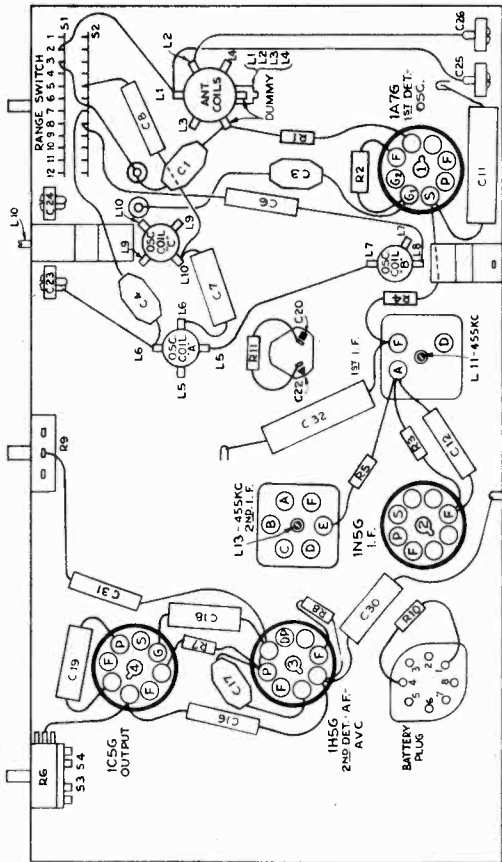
TUBE, TRIMMER AND PARTS LOCATION—BOTTOM VIEW
